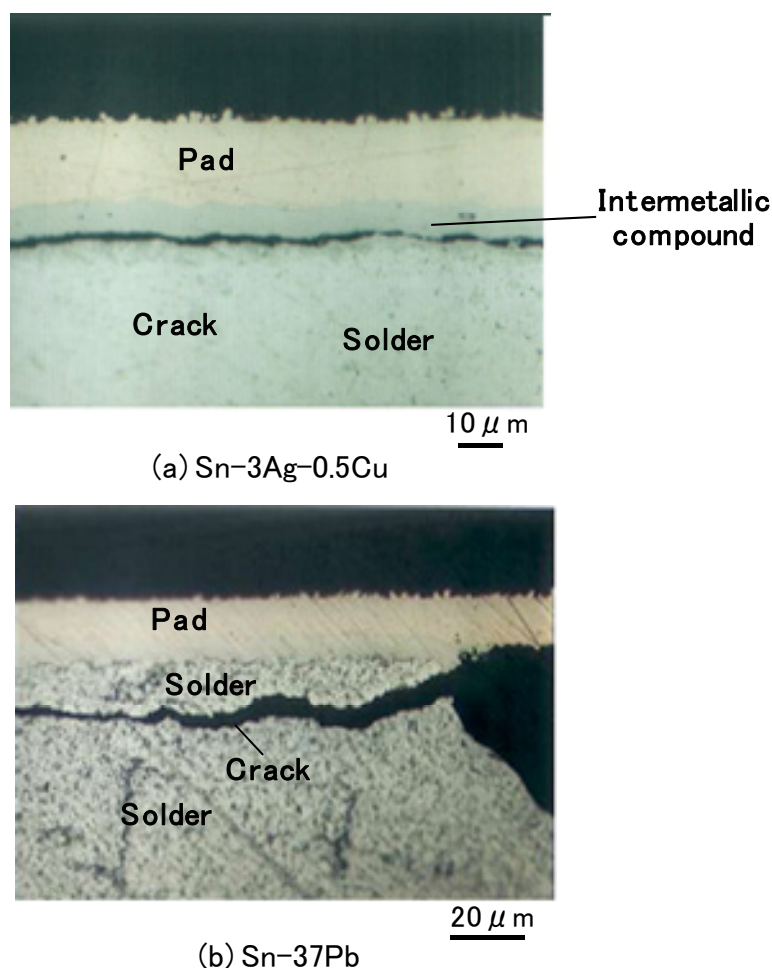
6 Crack at the solder joints of Tape-BGA package.
